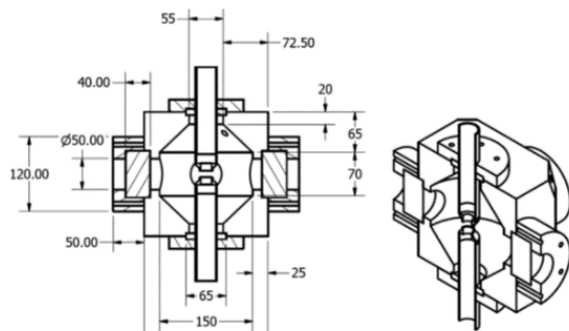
Cross-sectional and iso-metric views of the high-pressure chamber, with key dimensions, in mm (Sarnacki & Chelliah, 2018).
